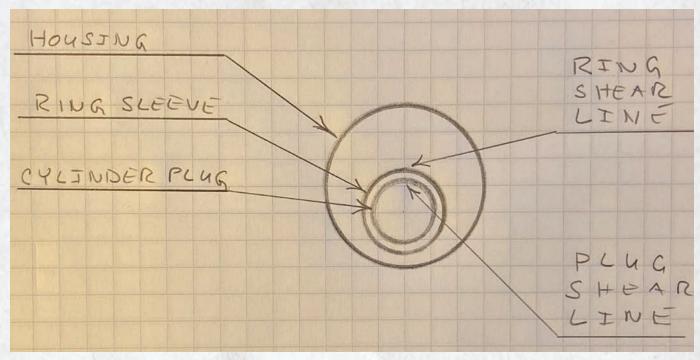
This drawing provides a cross-section view of the master ring cylinder.
